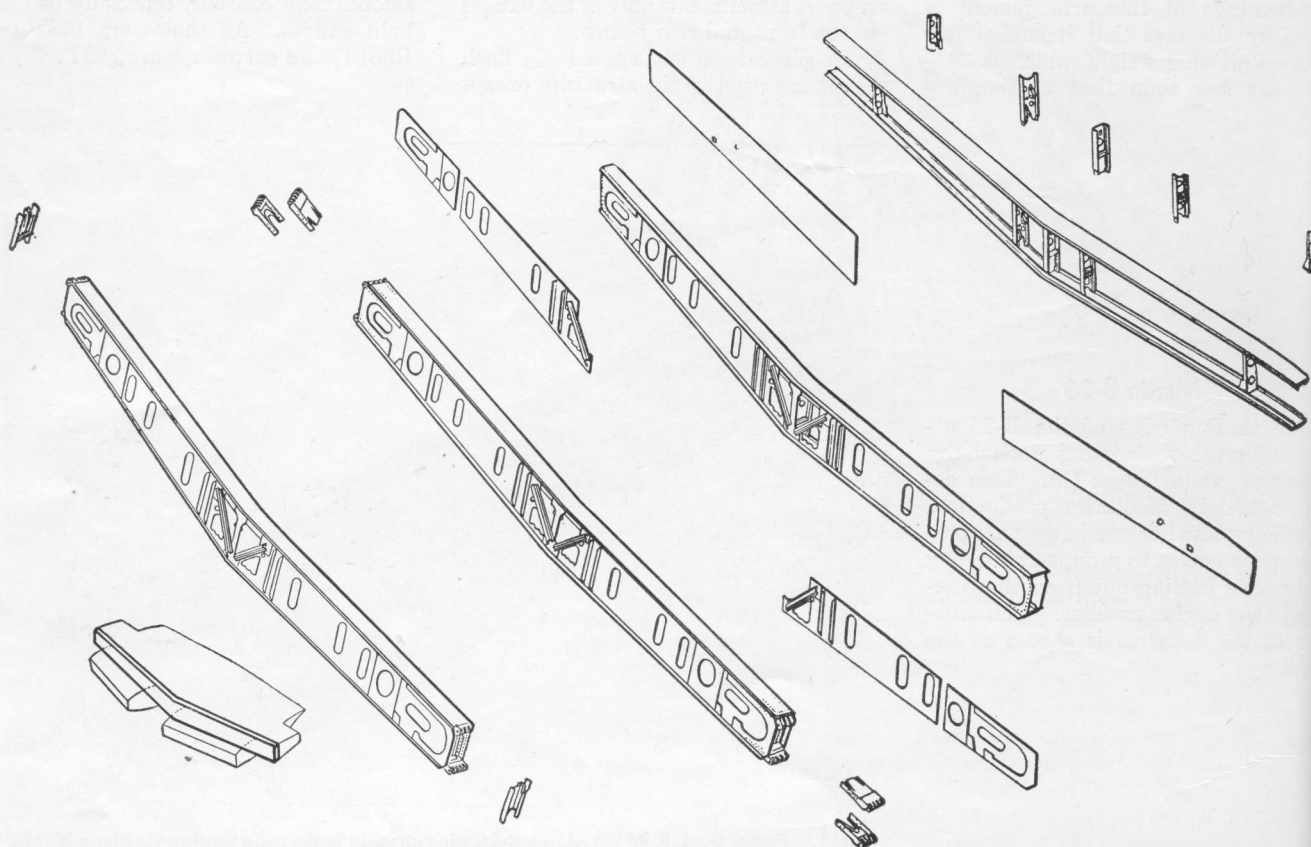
Exploded view of the main beam in the center section, showing double-web, box-type construction. Note the variety of bulkheads, and upper and lower channels (right), aft, front inboard, and front outboard web assemblies (center right), upper and lower wing fittings (center left), and completed center section beam with end bulkheads (left). The position of the main beam in the center section is shown at the extreme left.
